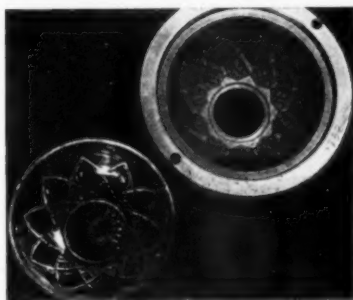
Glass mold and dish. The mold was cut on a Duplicator in 26 hours, complete, using a small section of the design cut in cast iron as the model and indexing.
